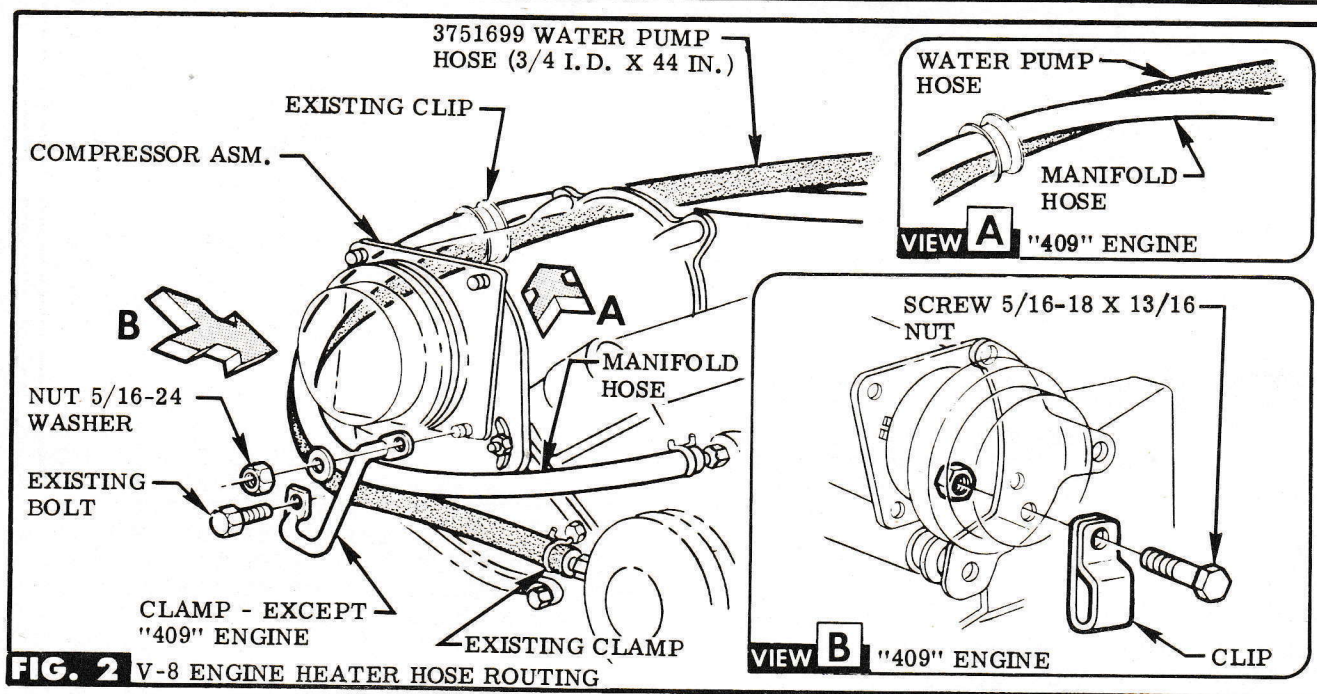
V-8 ENGINE HEATER HOSE ROUTING
